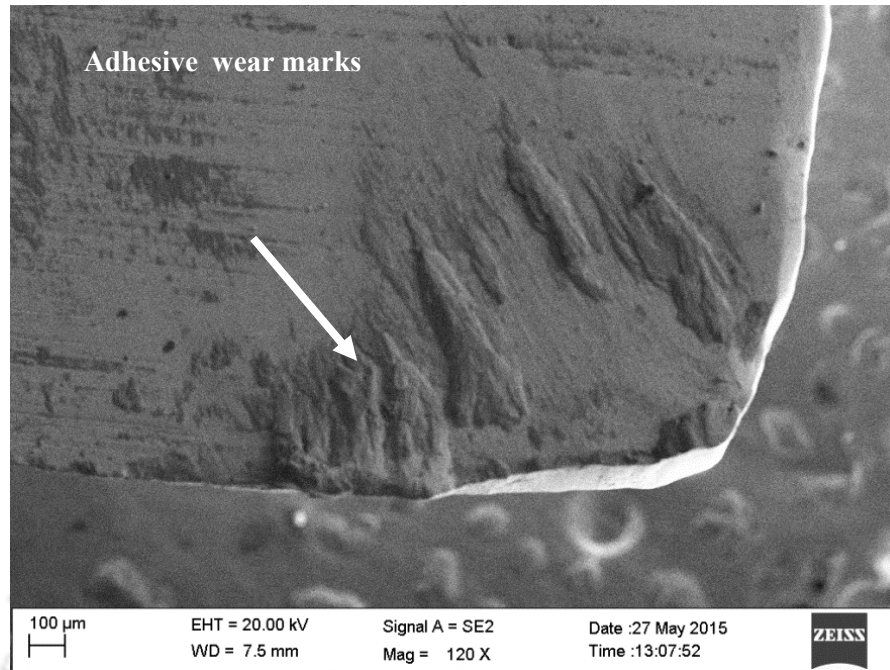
(a) Rake surface of the commercial cutting tool showing nominal wear
